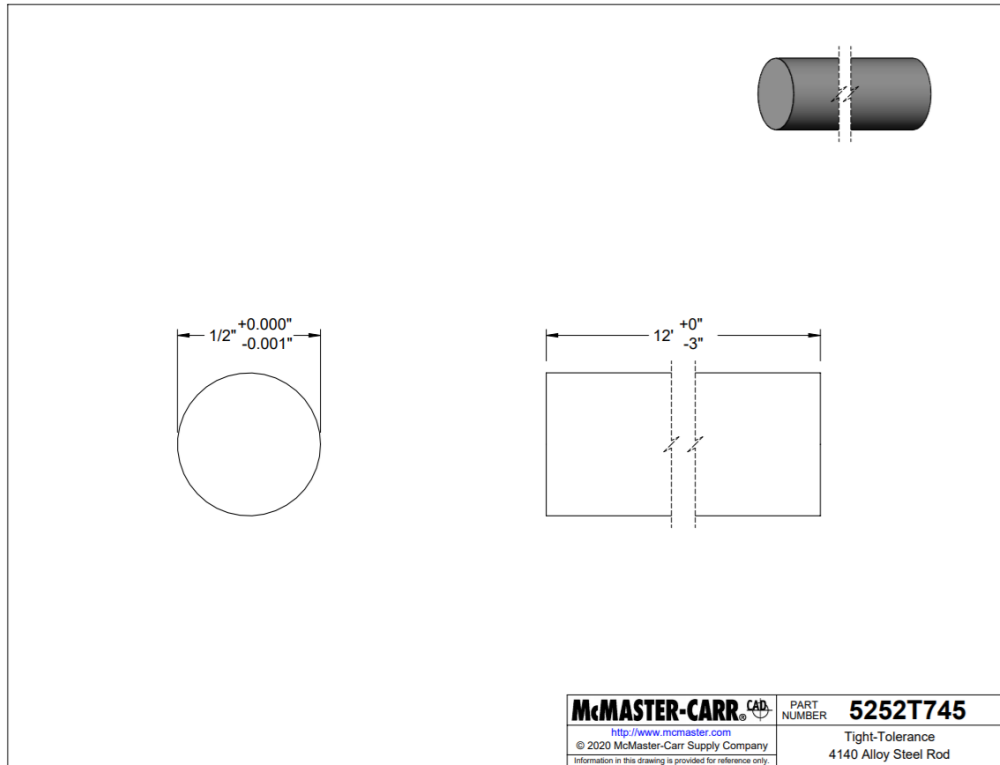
Drawing of Wheel Shaft Used on Base and Mid Section Provided by McMaster-Carr
